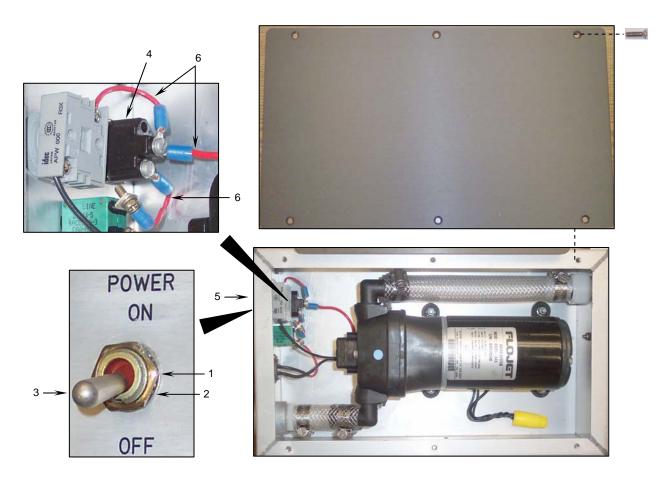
Removing the Sink Fill Pump Assembly Power Switch.
